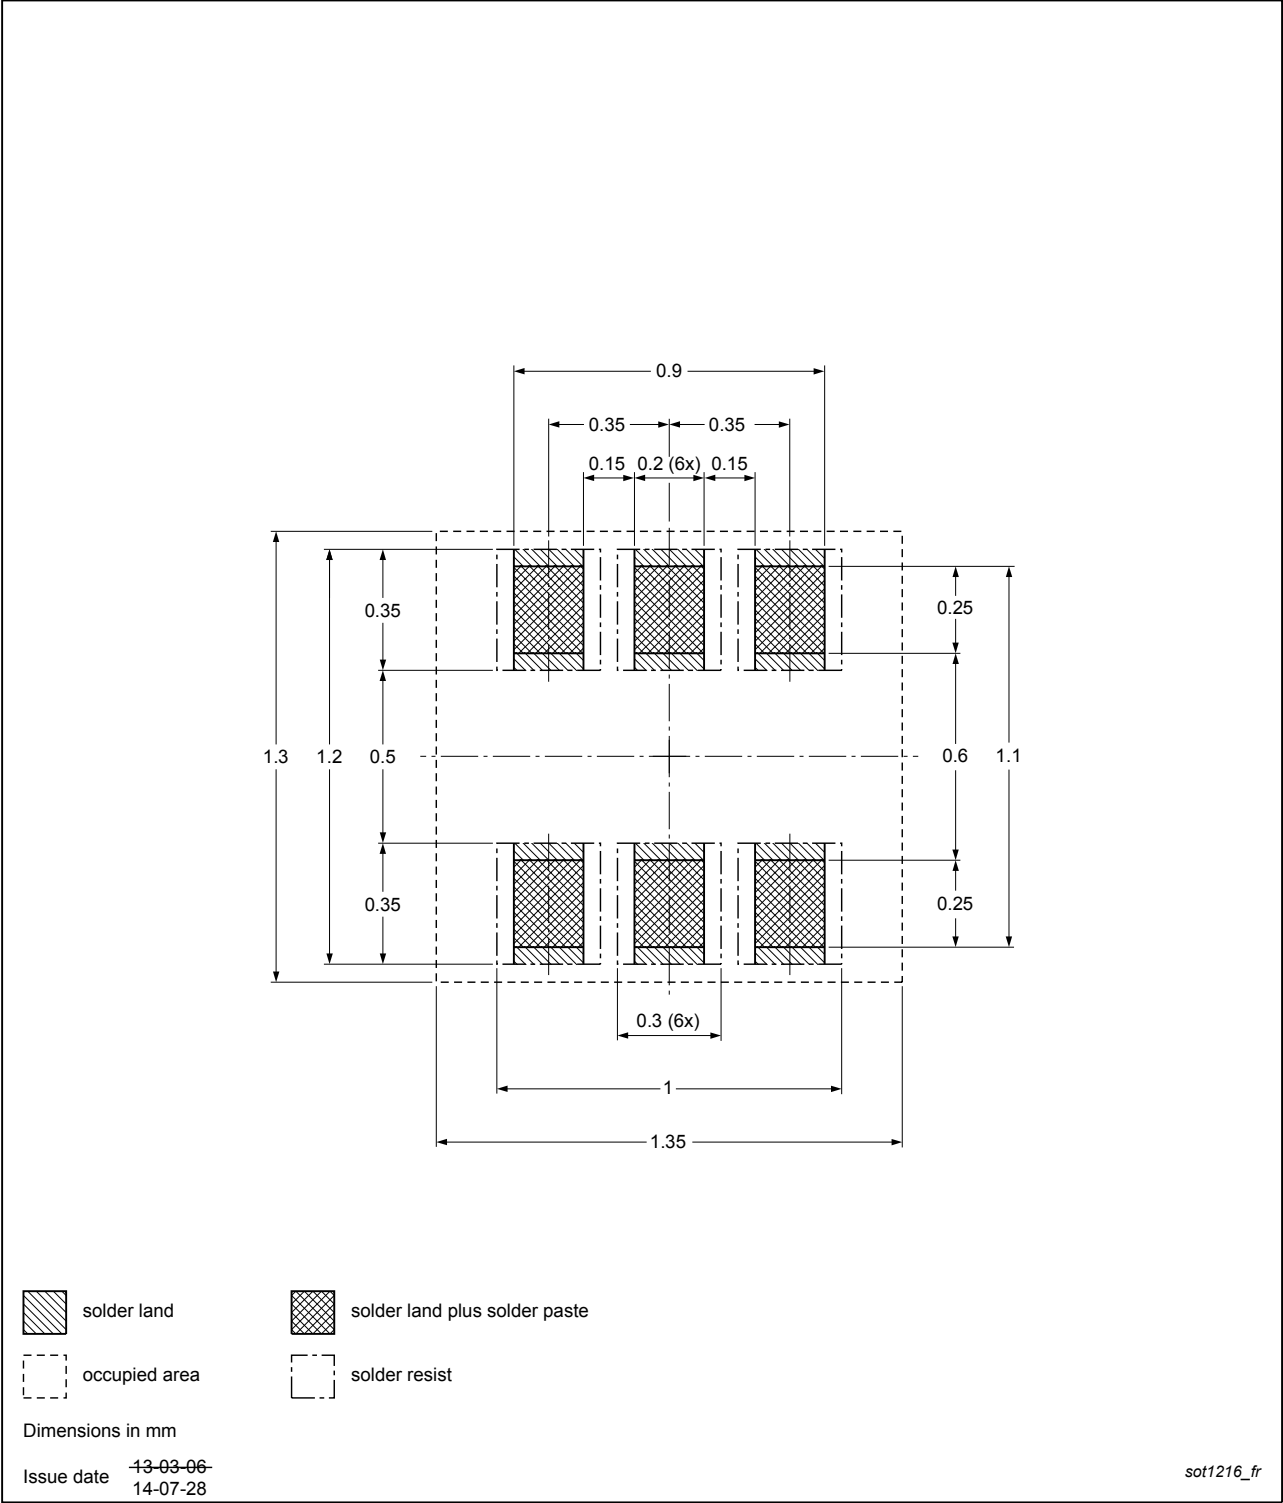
Reflow soldering footprint for DFN1010B-6 (SOT1216)
